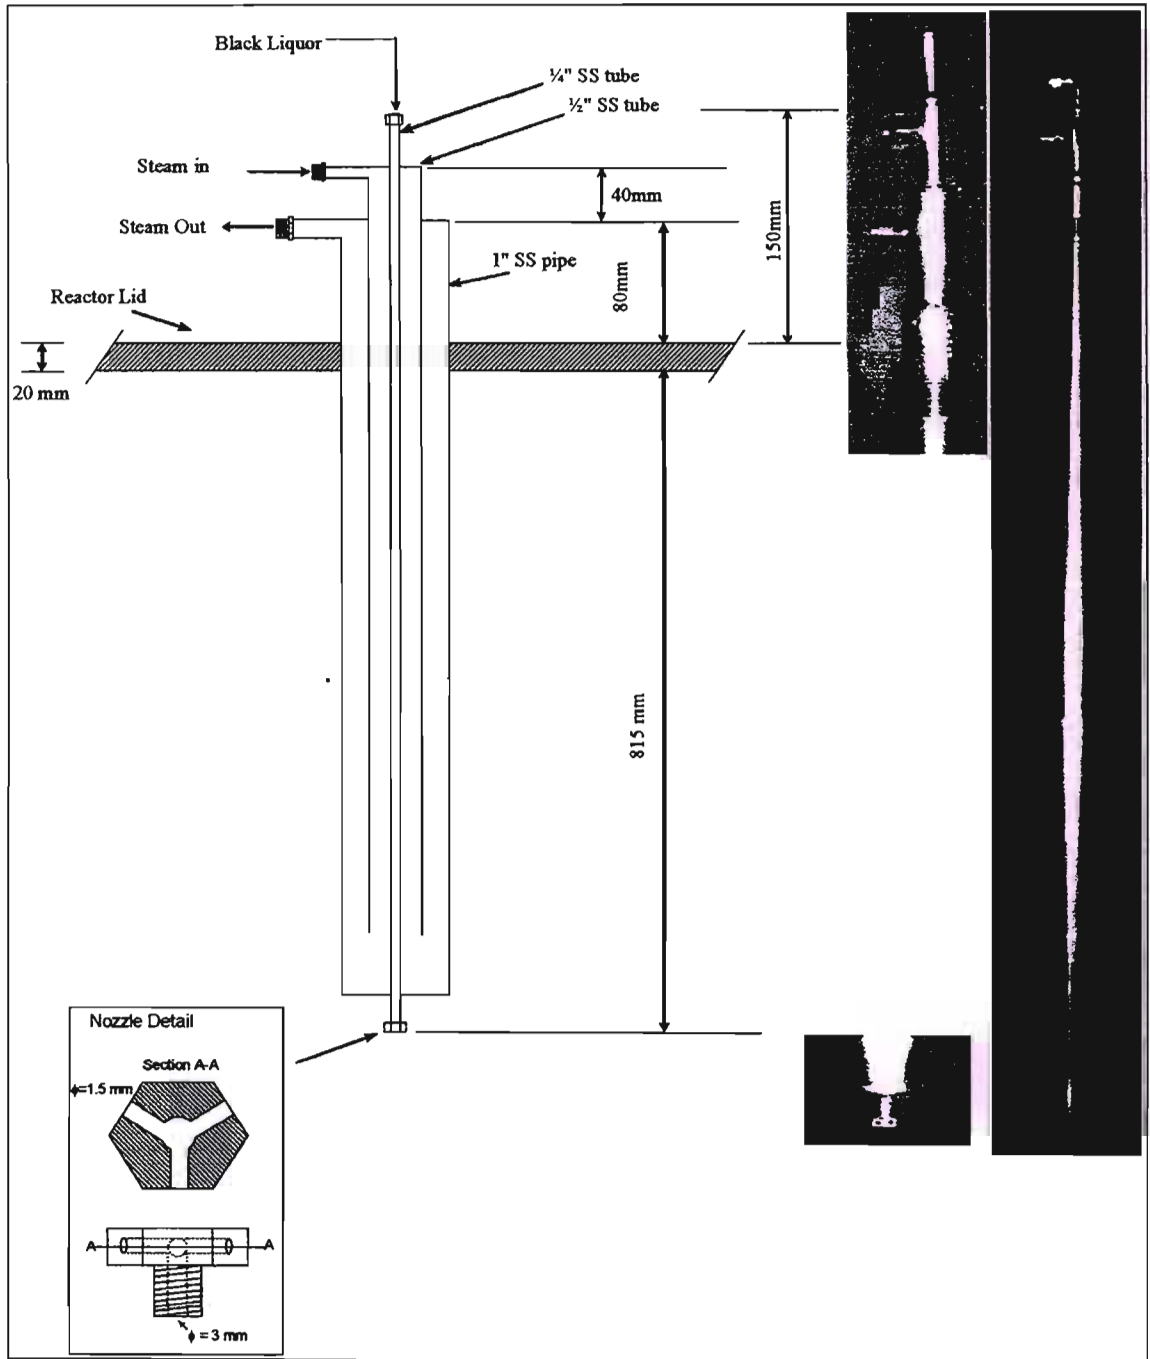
Sketch and photos of the black liquor injection tube showing the important nozzle dimensions
